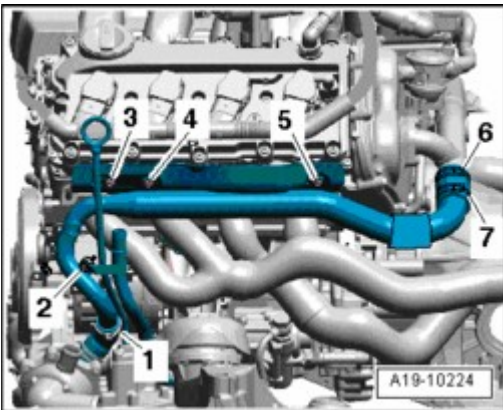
Removing Bolts, Oil Dipstick Guide Tube Upward, Bolts & Hose Clips
